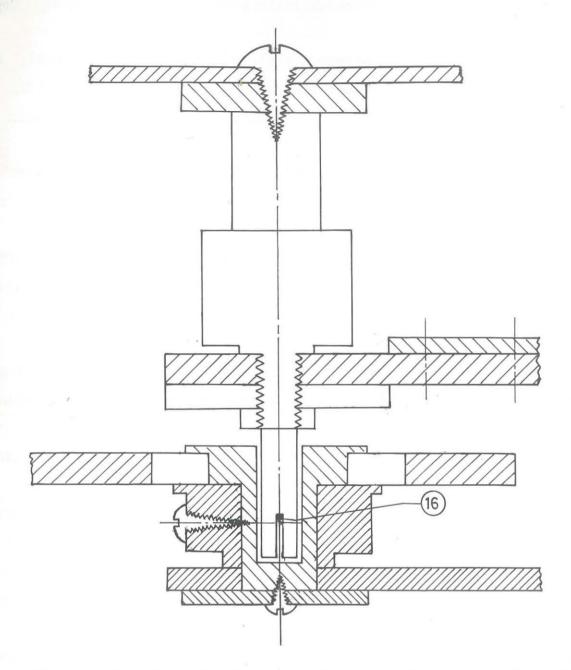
Sectional view of the whole assembly of an electrogoniometer
